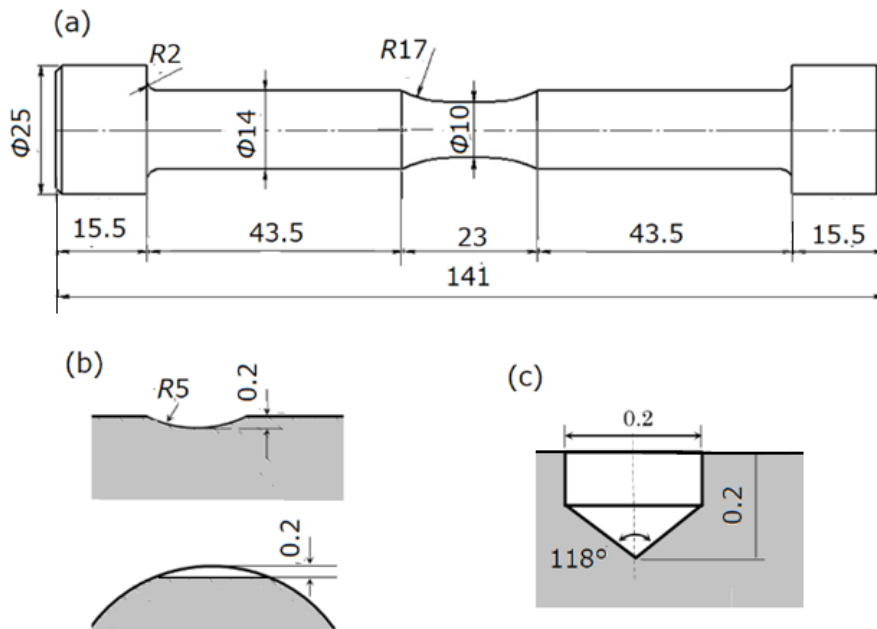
Specimen geometry; (a) Dimensions of the specimen (mm), (b) Partial notch, (c) Hole.
